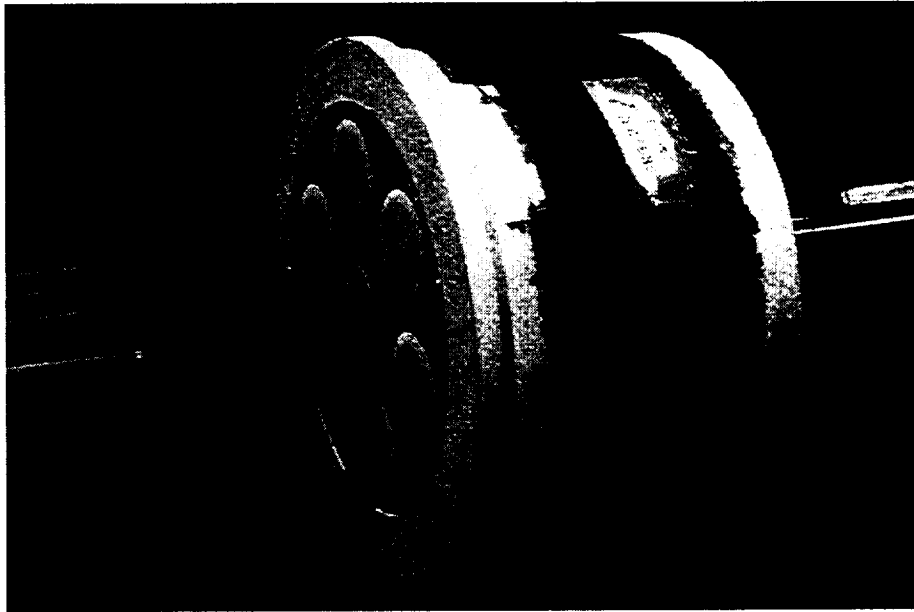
Inner Skin Sub-Assembly on Sand Mandrel
